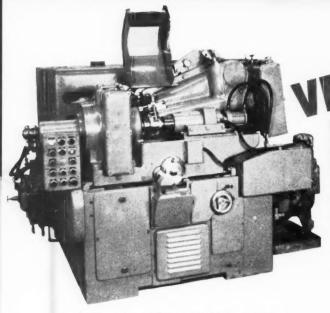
Front view of Fellows No. 12 Gear Finisher.
